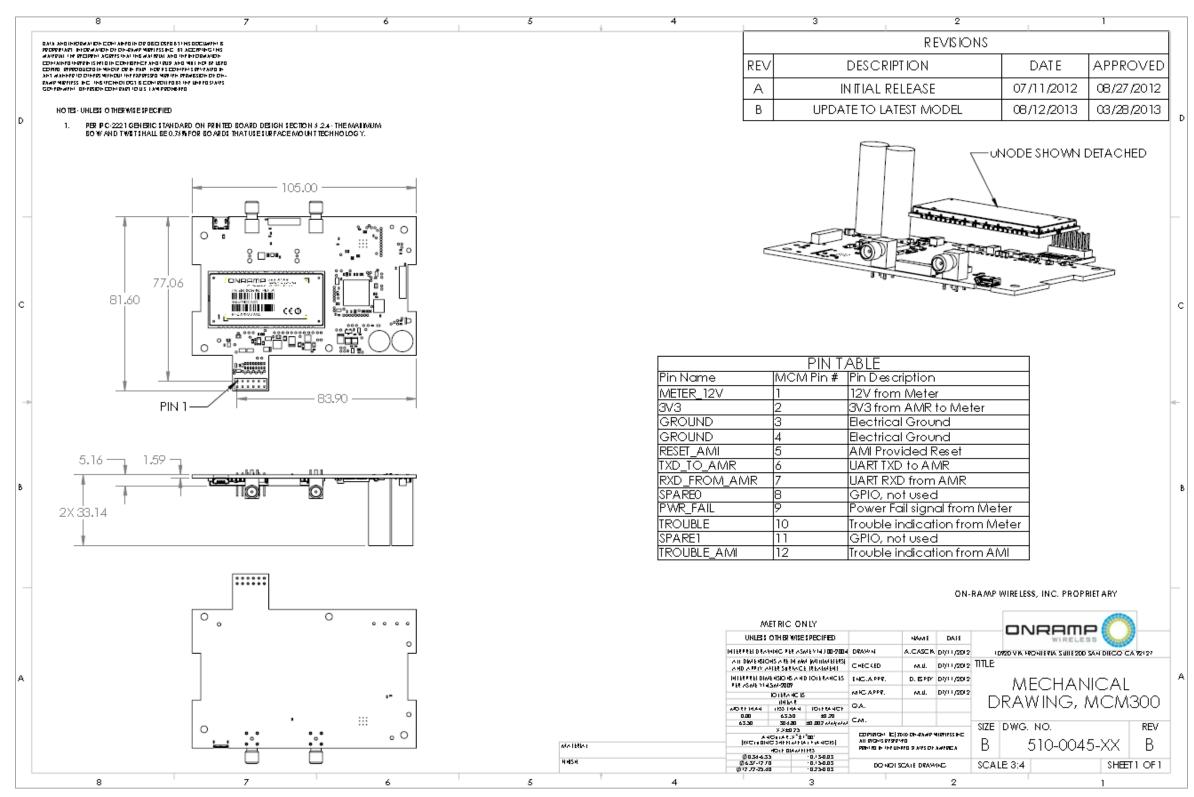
Mechanical Dimensions for the eMCM Circuit Board
